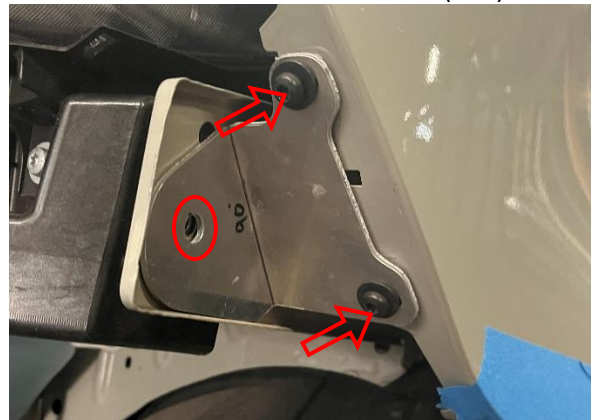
Fender Support Bracket Installation (Passenger's Side Shown)
